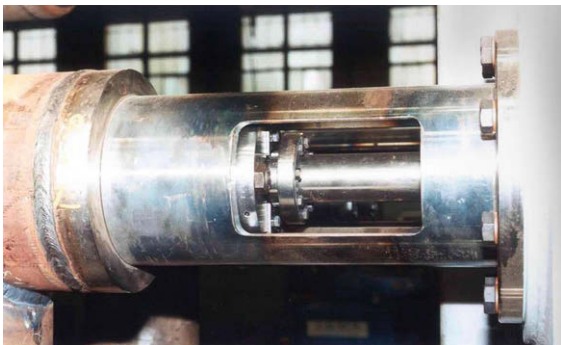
Drive system – drive shaft and mechanical seal of an SSE. (Photo courtesy of BORSIG)
